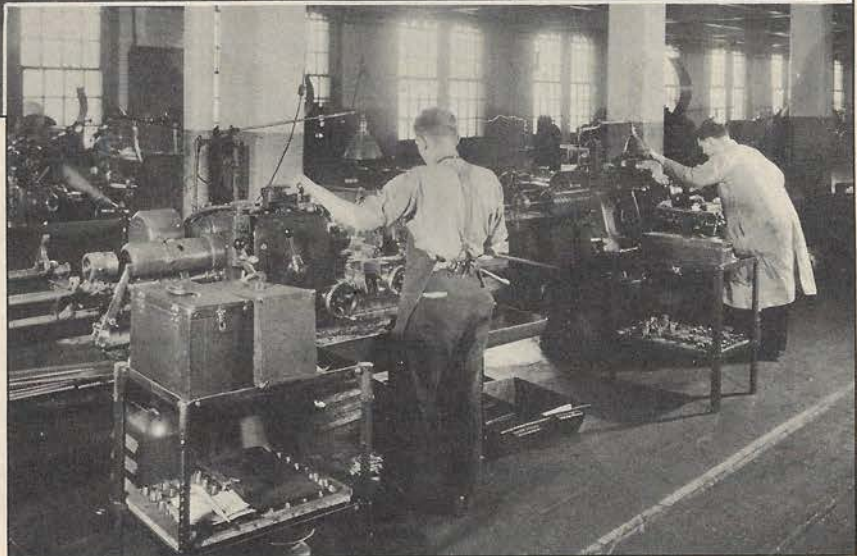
Location of turret lathes on upper floor with machines near columns where floor is most rigid.
